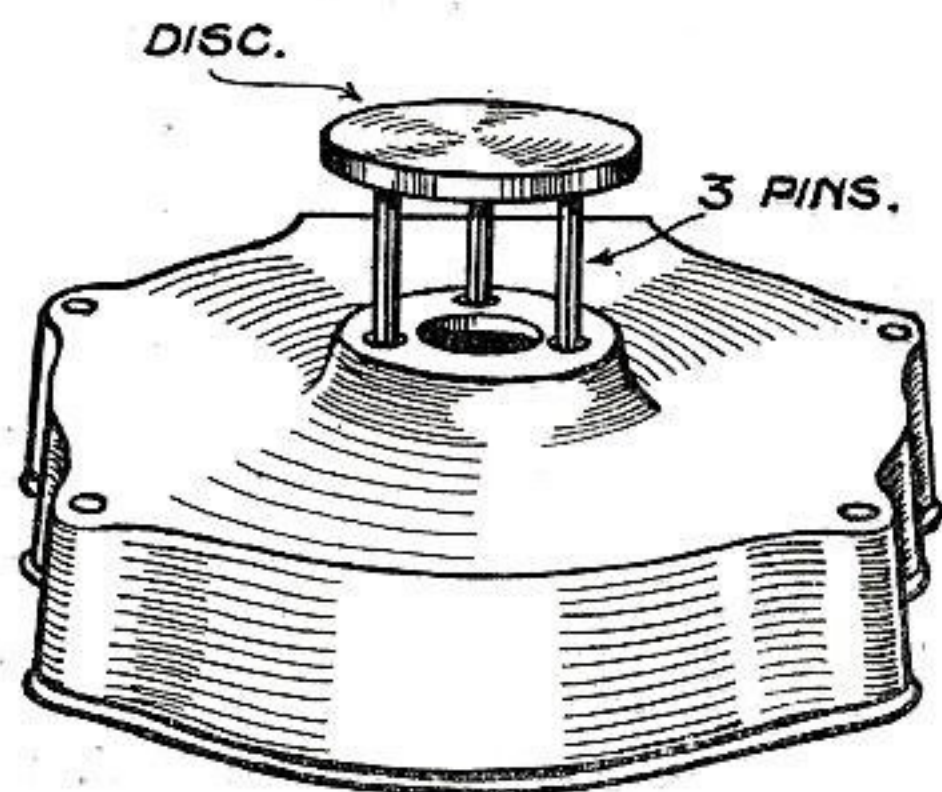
REMOVING THE DRIVING-SIDE MAIN BEARING.
